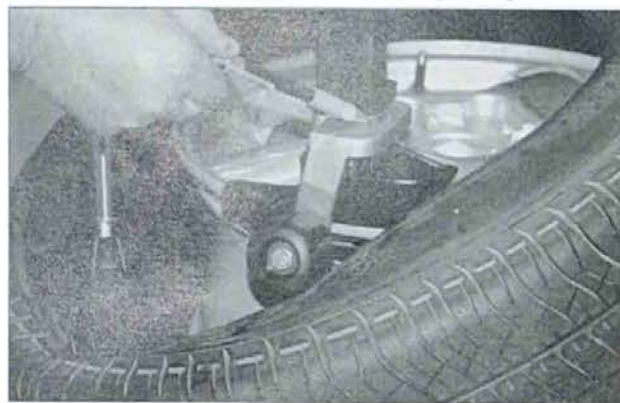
Duckhead Roller Properly Mounted On Bracket
